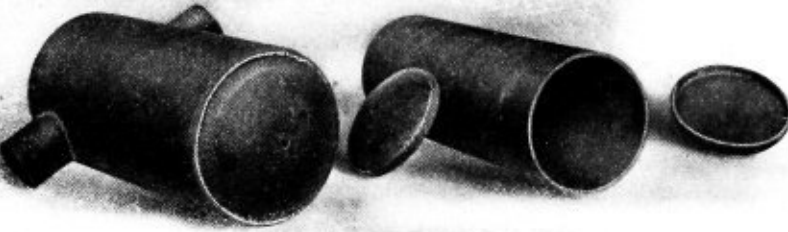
12-Inch and 16-Inch Drums Welded with Metallic Electrode
